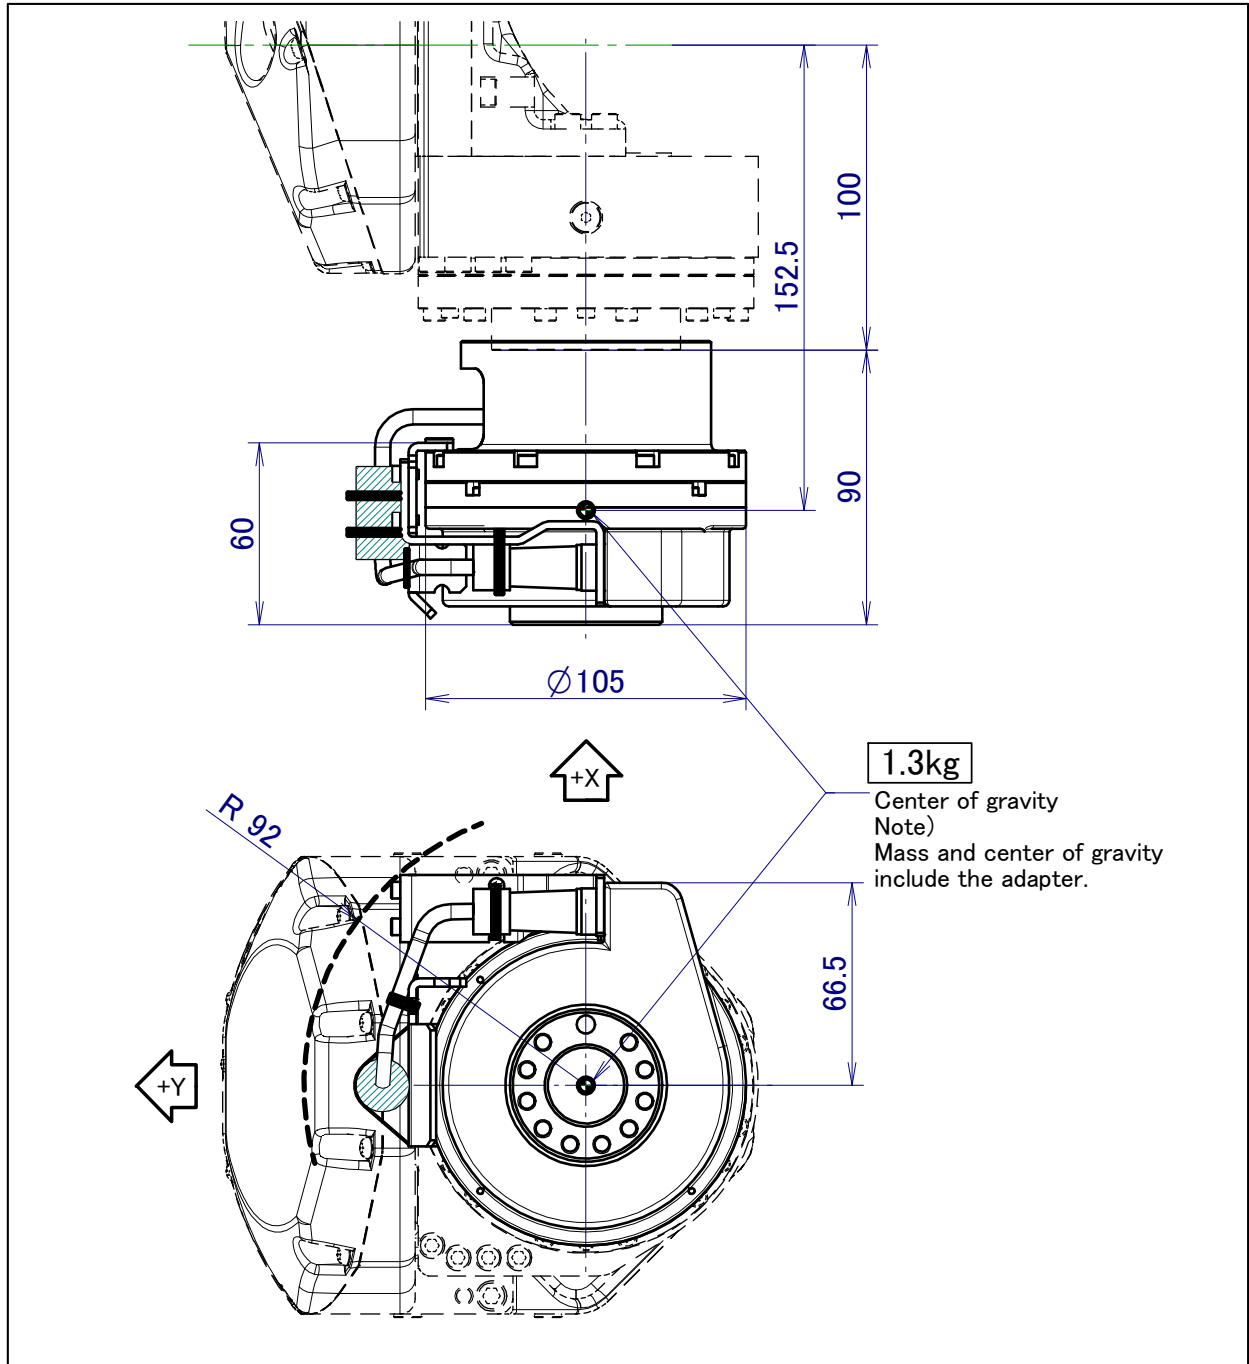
(c) External dimensions of the force sensor head
